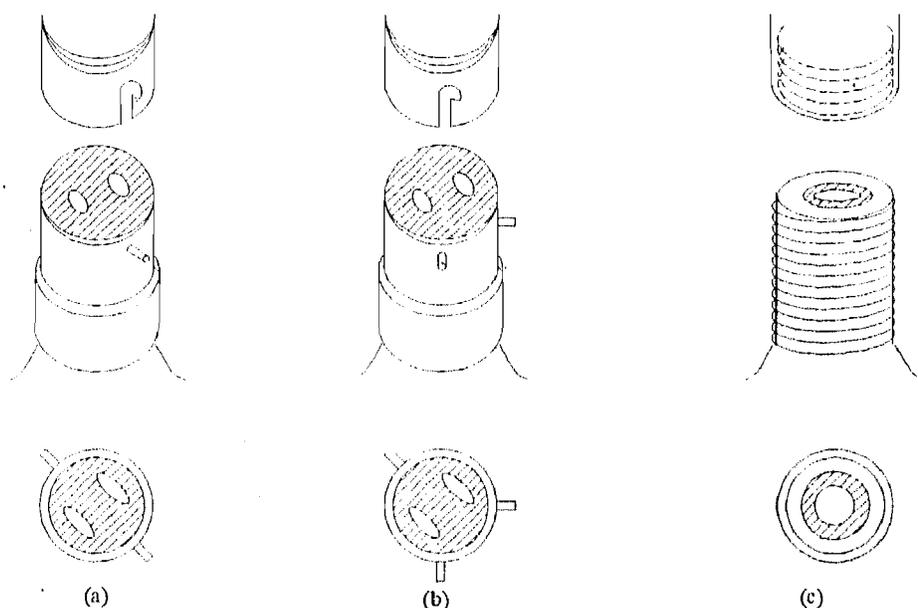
Lamp Bolders bayonet Cap Type and Edison Screw Type.
